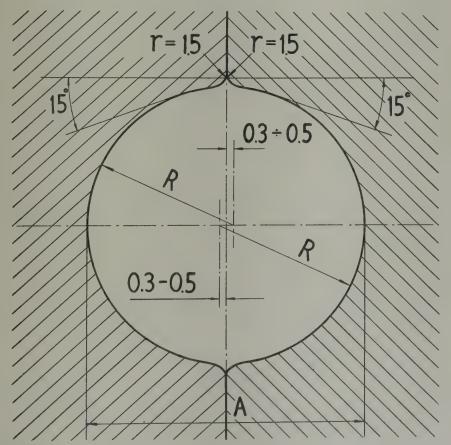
Cross section of Gripping impression in set of die for forging machine: A is equal to the diameter of cold stock minus o 3 to o 5 mm.
